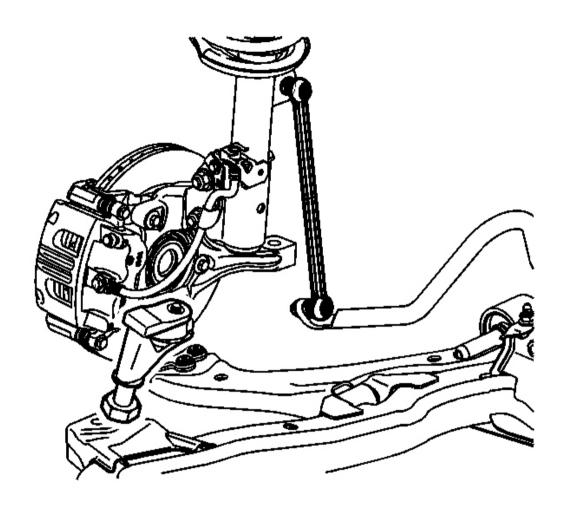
Ball Stud & Knuckle Courtesy of GENERAL MOTORS CORP.
